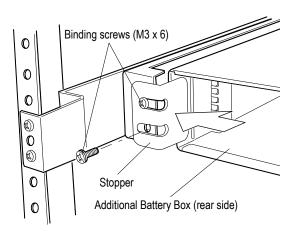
Fixing the Rear Side of the Additional Battery Box (RS6000 rack frame)
